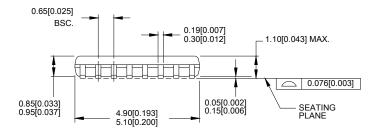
16-Pin TSSOP 4.40 mm Body Package
